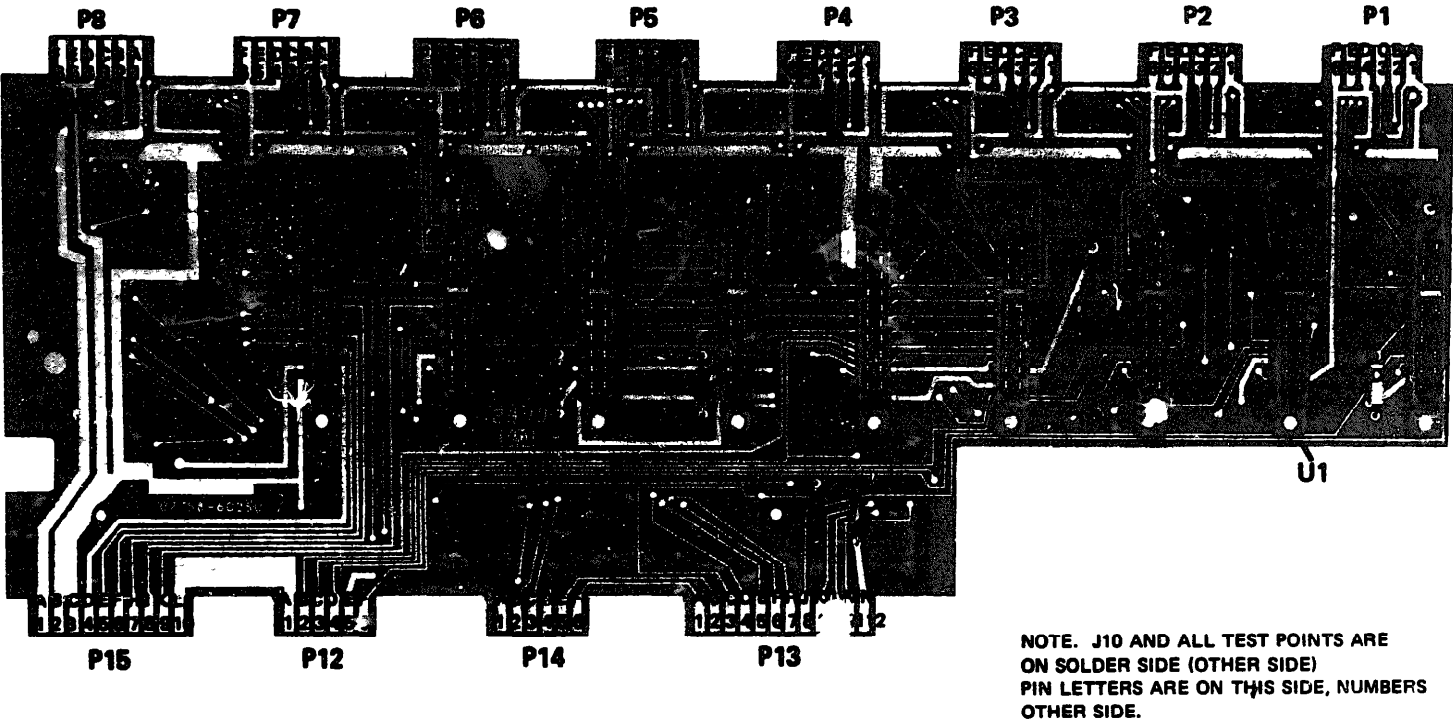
Assembly A3A1, Transfer PC, Component Locations
